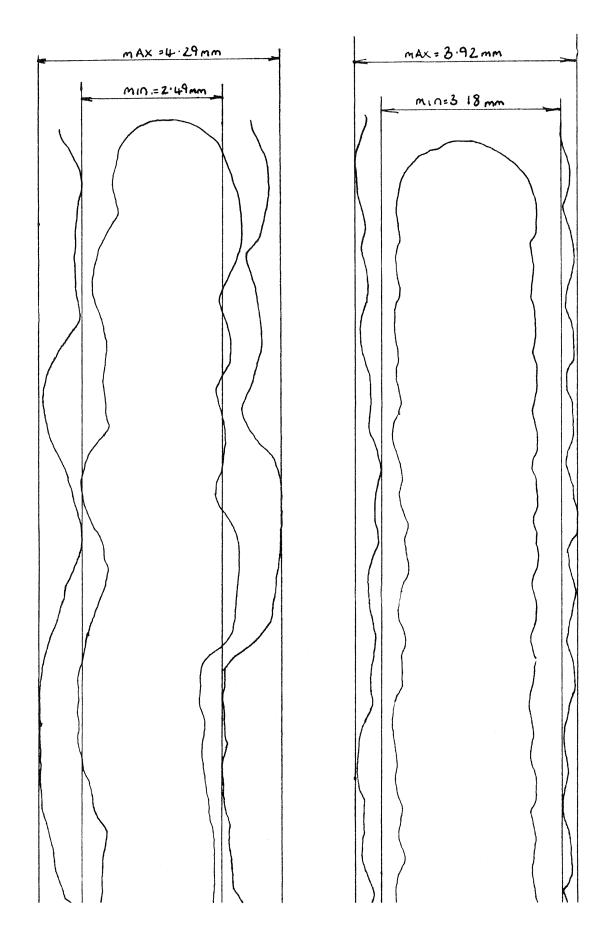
Cross-section of welded walls before and after investigating the effect of weld bead parameters
